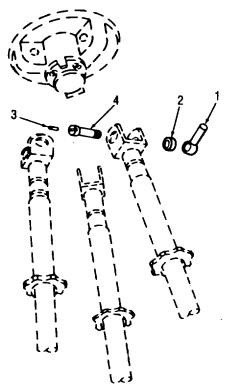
Disassembly/assembly of fixed mount base assembly
